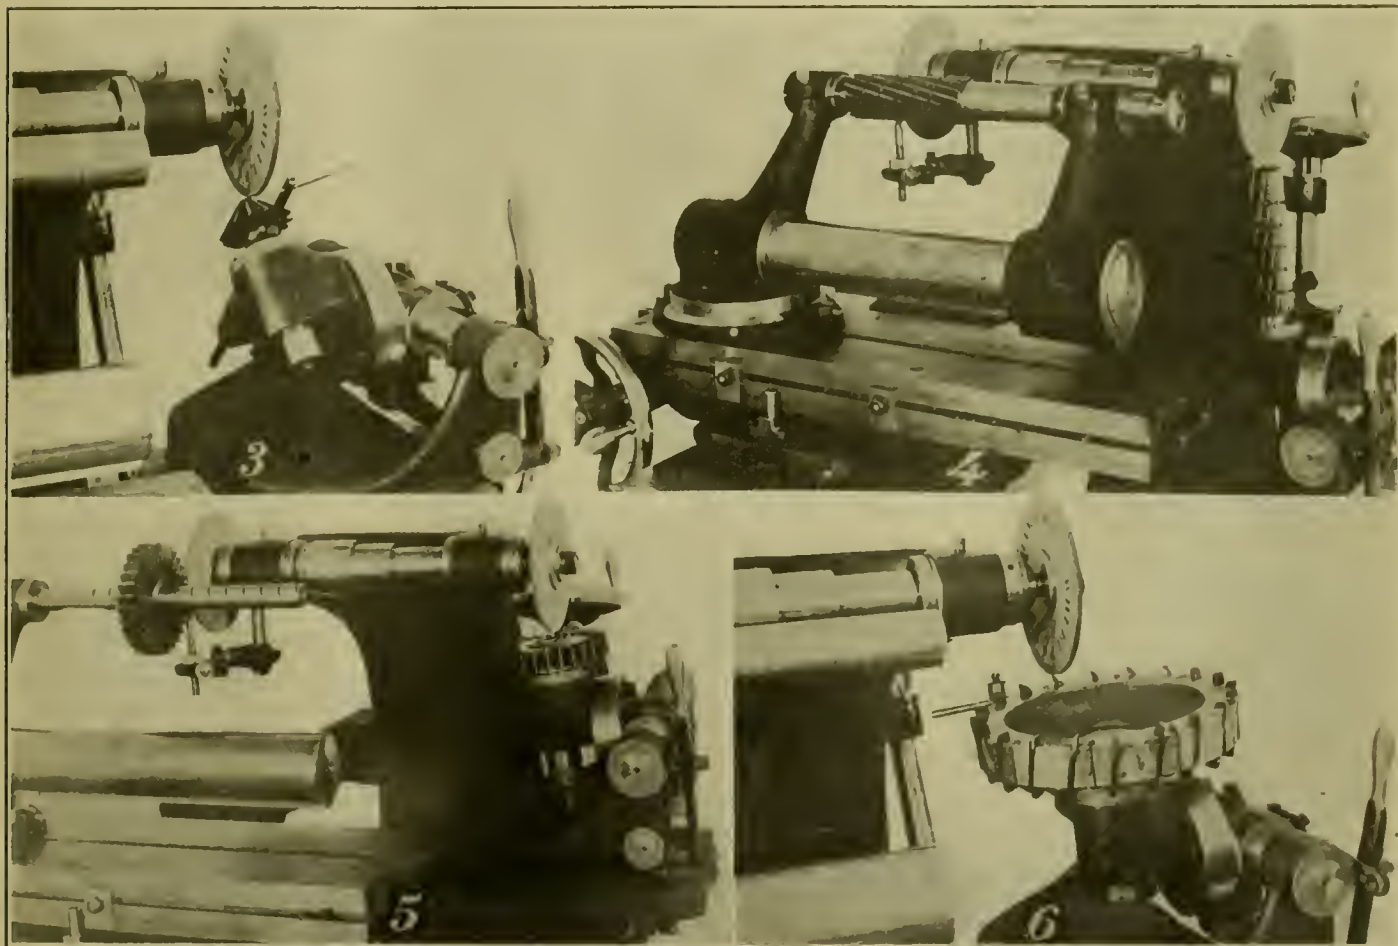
FRONT VIEW OF SLIDING HEAD GRINDING BEVEL CUTTER.
